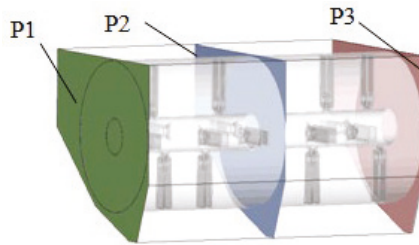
Selection of CC section. Section P1 was located on the left side of the tool axis and passed through the end face of the tool axis; section P2 was located at the center of the tool axis and parallel to the P1 plane; section P3 was located on the right side of the tool axis and passed through the end face of the tool axis.
